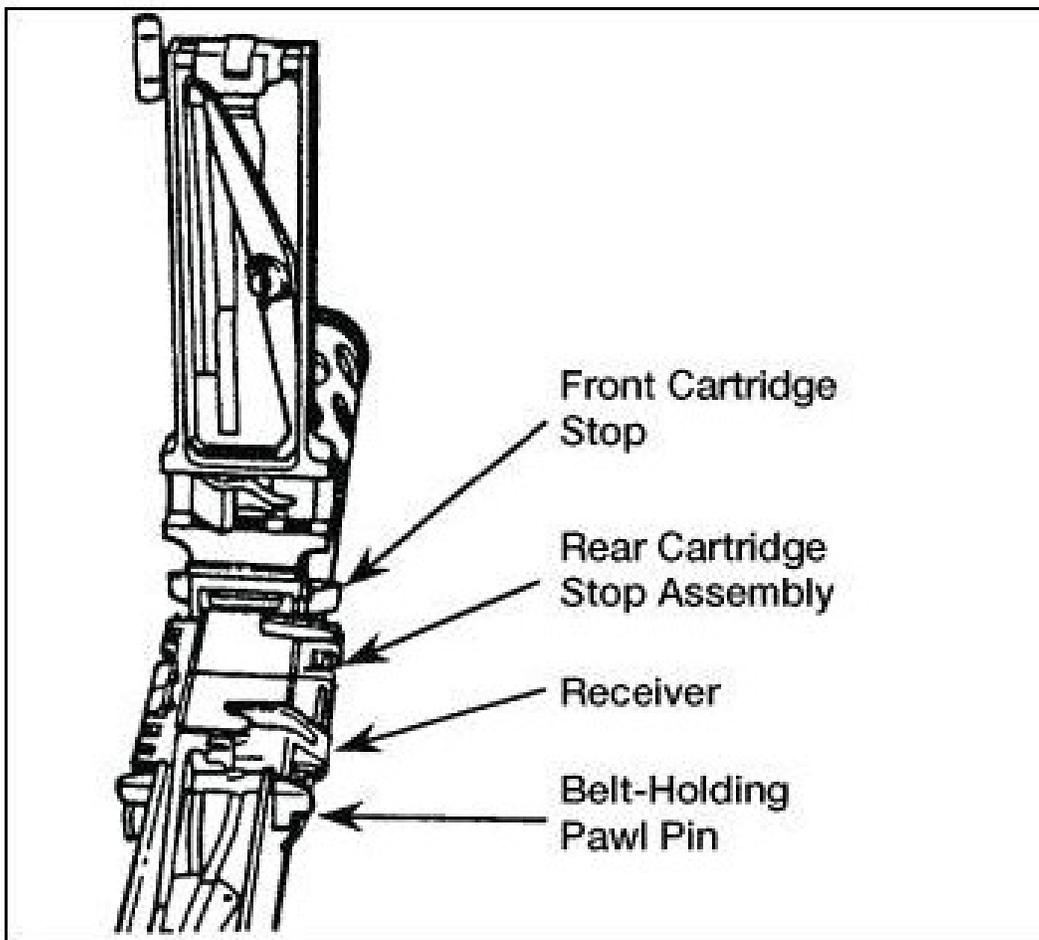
ST-1025_20 (Removal of the cartridge stop assemblies)
